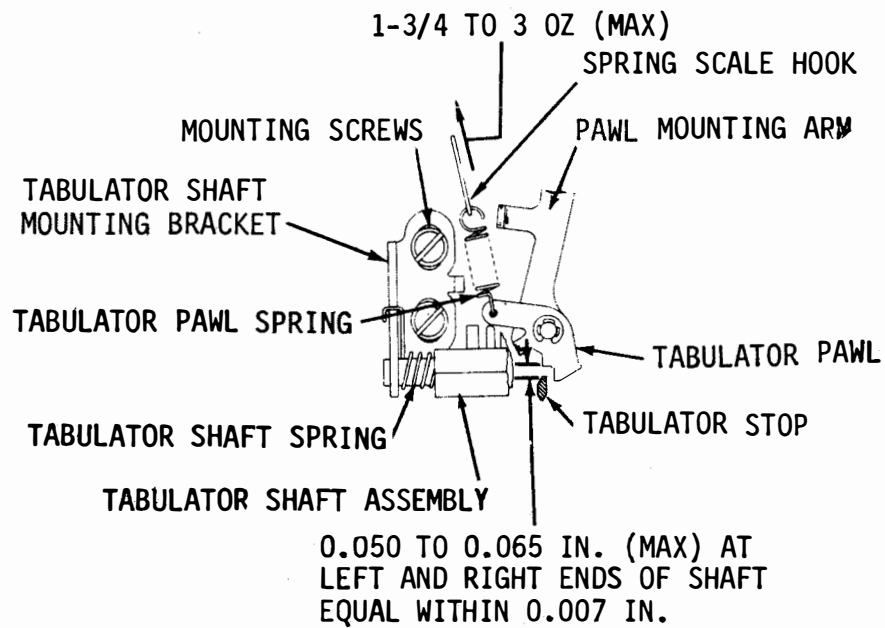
Tabulator Shaft Mounting Brackets and Tabulator Pawl Spring, Front View
